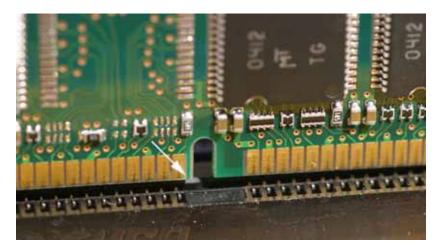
Step 4 - Press Down on the PCB to Set the Module into Its Final Position
